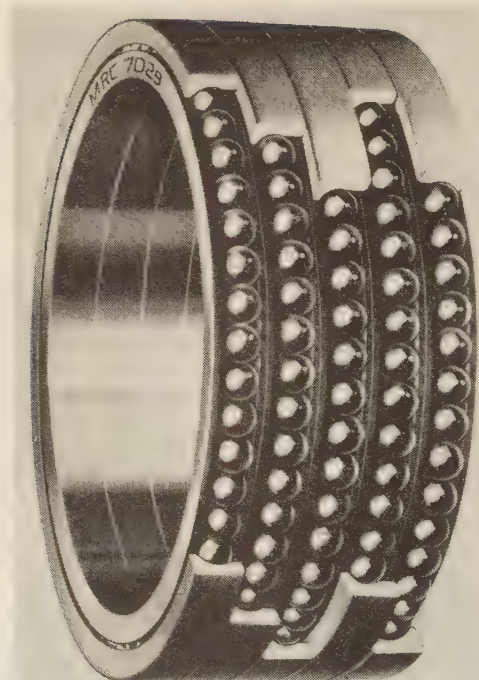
STACKED BEARINGS FOR HOLDING BLADES ON CONTROLLABLE PROPELLERS
